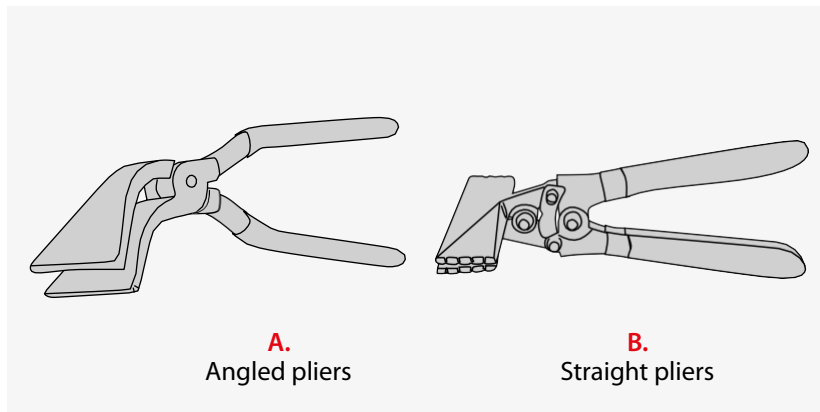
TOOLS FOR PANEL LOCK CRIMPING
